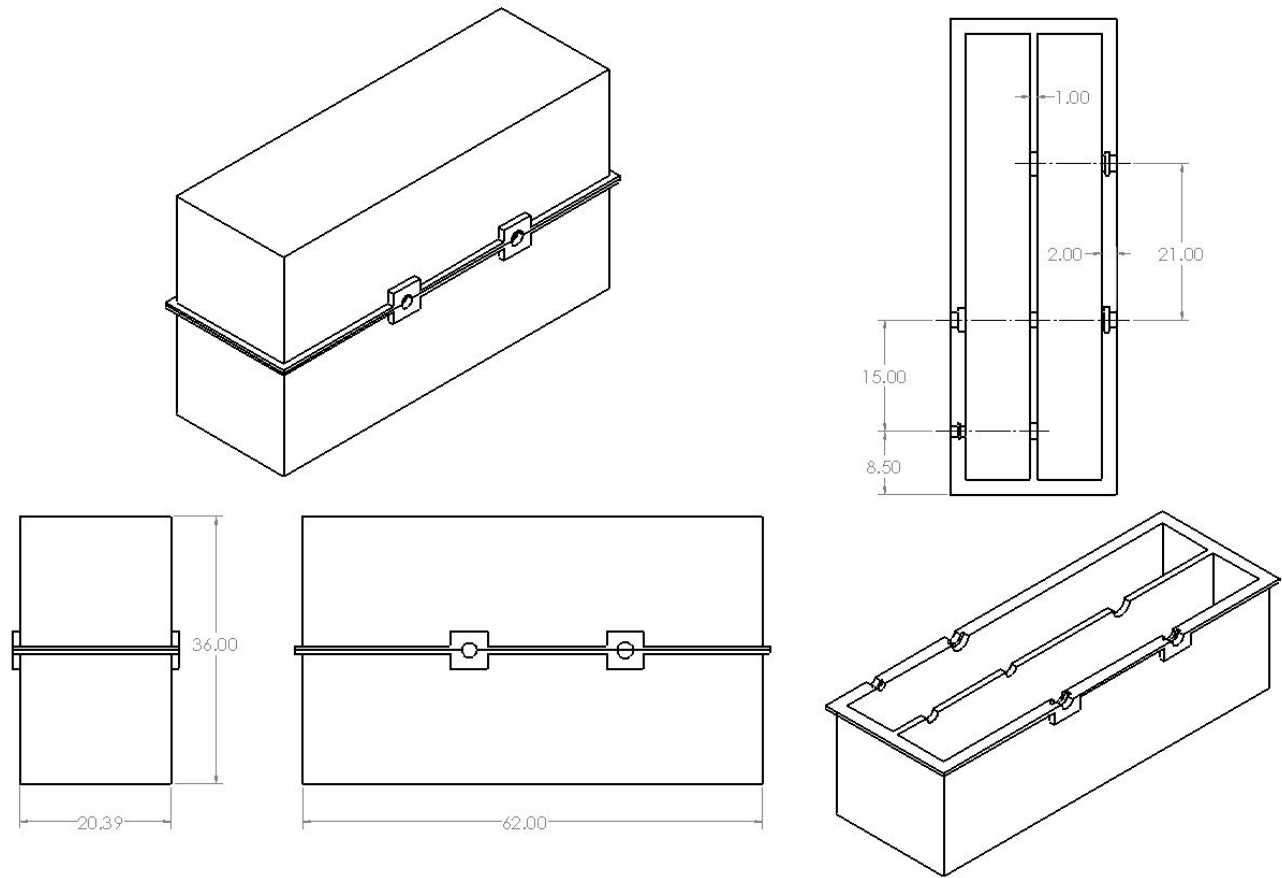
Main Dimensions (Inches) of the Gearbox Casing
